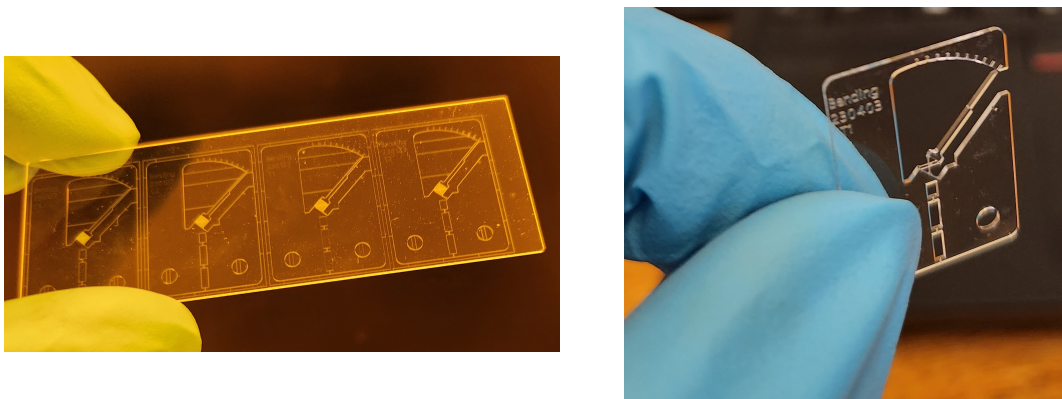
Bragg grating sensor tester manufactured from a 500 μm fused silica substrate. On the left, a view of 4 samples inscribed on the same plate with the FEMTOprint machine. On the right, is the view of one finished sample obtained after the KOH wet etching.
